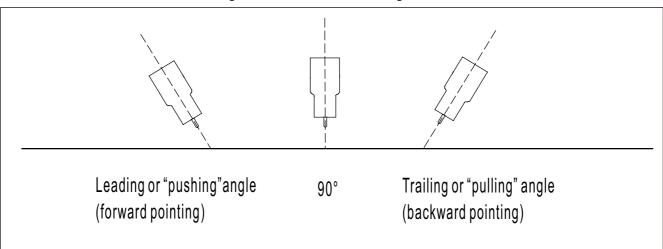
Nozzle Angle Right Handed Operator
